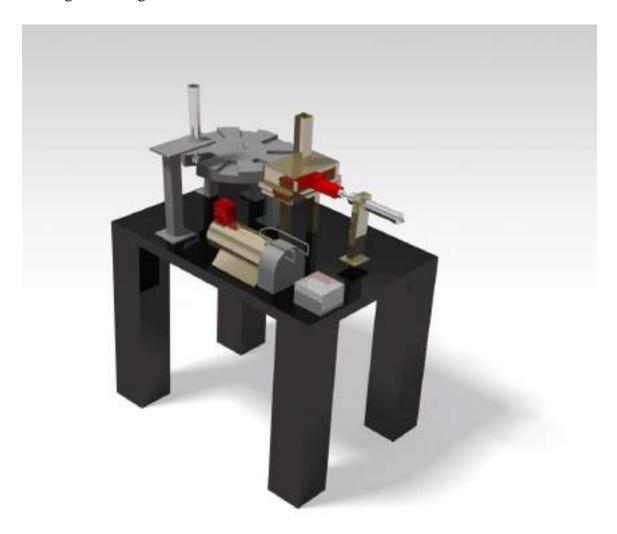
CAD MODEL OF U CLOTHS PEG MACHINE
